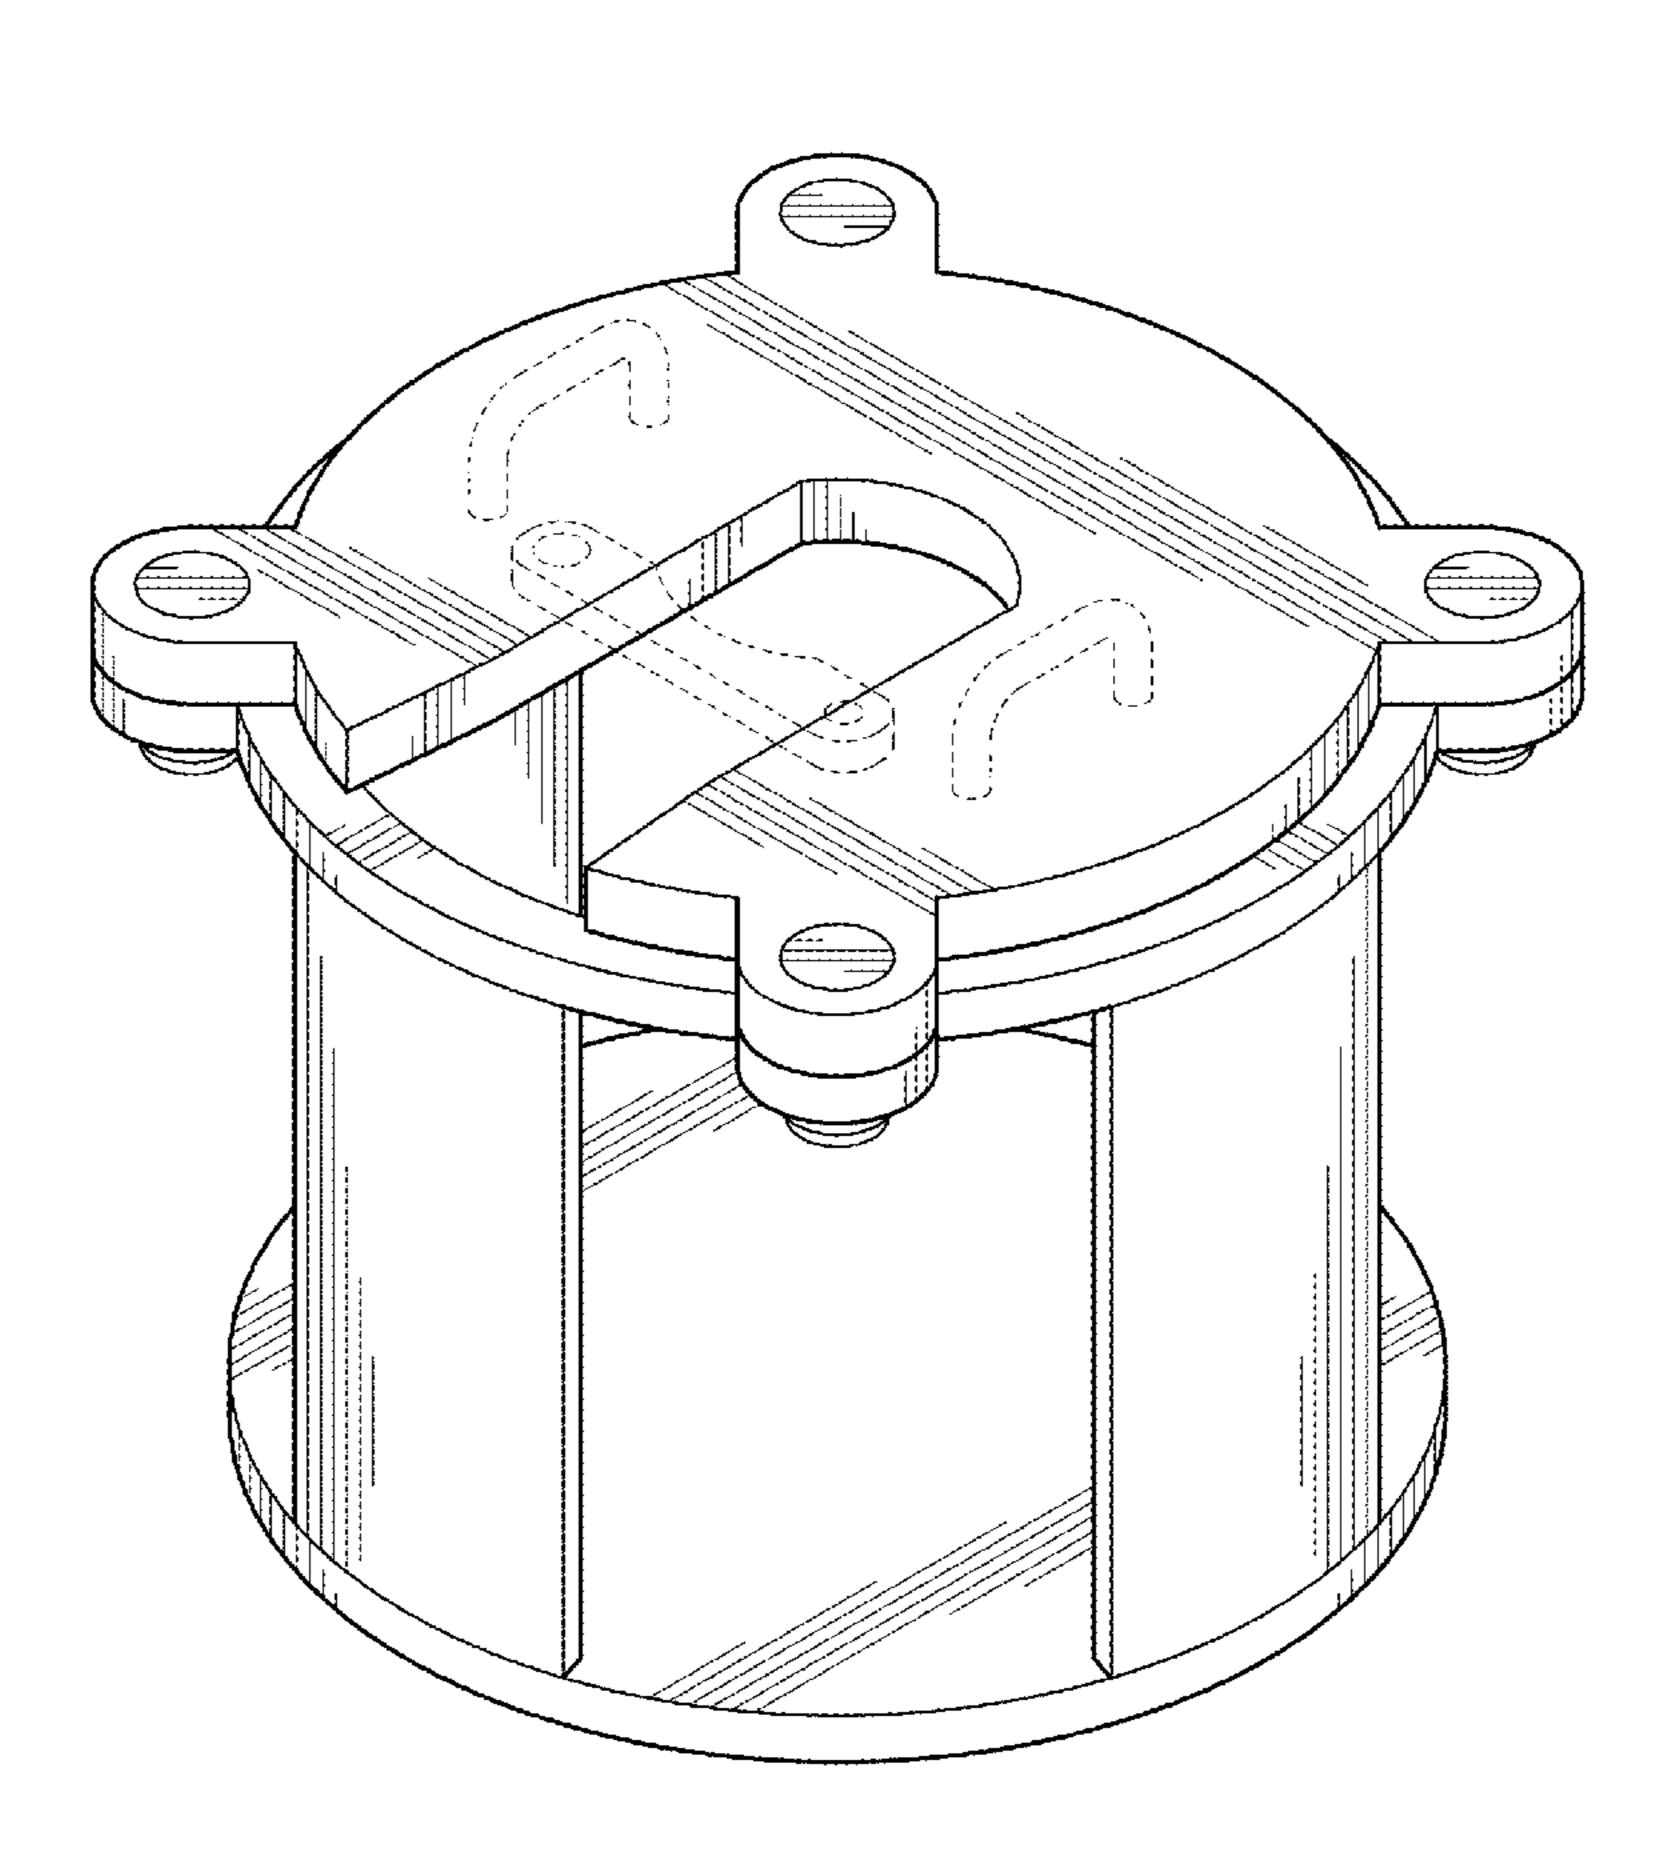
is a top perspective view of a bit breaker showing my new design, in an assembled condition;
